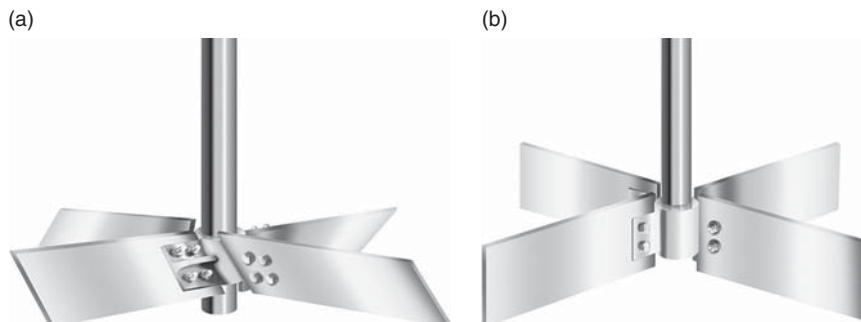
(a) Pitched-blade turbine impeller (b) straight-blade turbine impeller. (Courtesy of Chemineer, Inc.)
